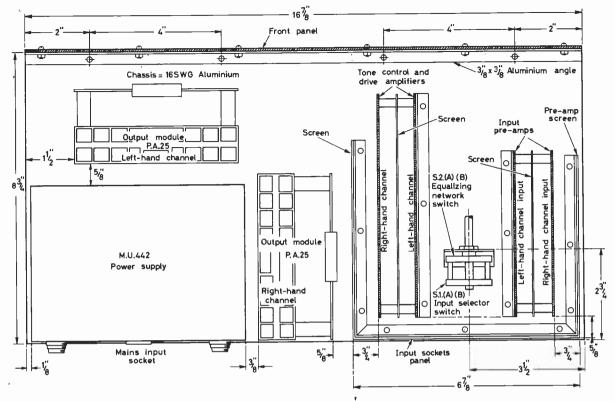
Layout of units on chassis. Chassis dimensions must be adhered to if specified cabinet is to be used.
